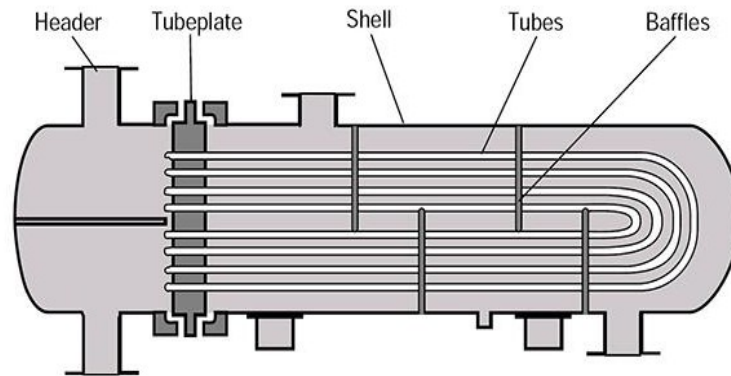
U-tube type shell and tube heat exchanger [11]
